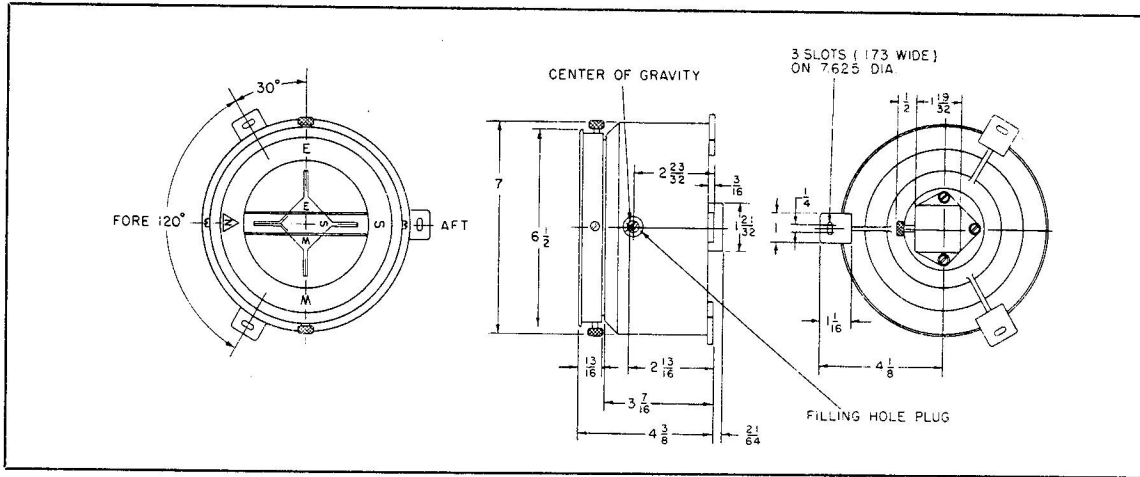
Dimensional Drawing Type D-12 (Pioneer Type 1801-1-A)
